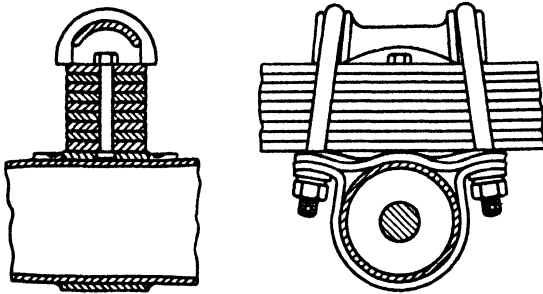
MOUNTING DESIGNED TO MINIMIZE INACTIVE SPRING MATERIAL.
